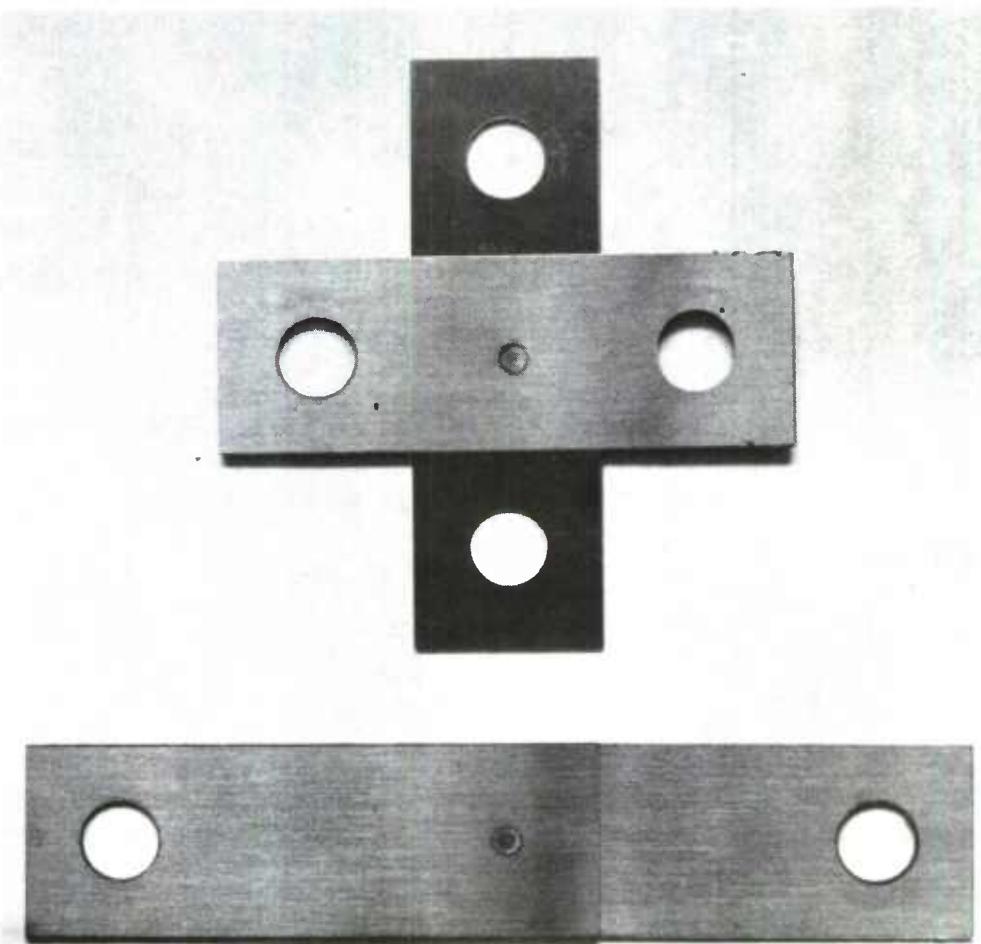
Photograph of Spot Welded Tension and Shear Specimens
